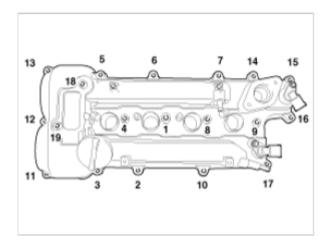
Identifying Cylinder Head Cover Bolts Tightening Sequence Courtesy of HYUNDAI MOTOR AMERICA
